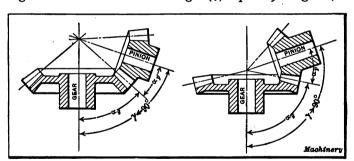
Acute-angle Bevel Gearing Fig. 6. Obtuse-angle Bevel Gearing
